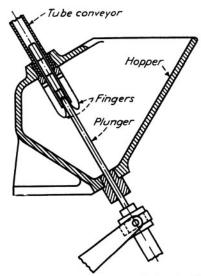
Hopper used for feeding shell-like pieces into a tube conveyer. A reciprocating plunger picks up the work at the lower end of the stroke and deposits it in snap fingers at the end of the conveyer tube.
